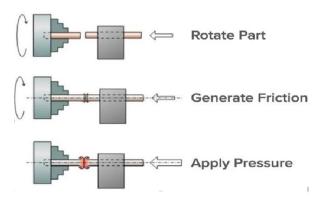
Friction welding cycle (Spodar, 2018)
